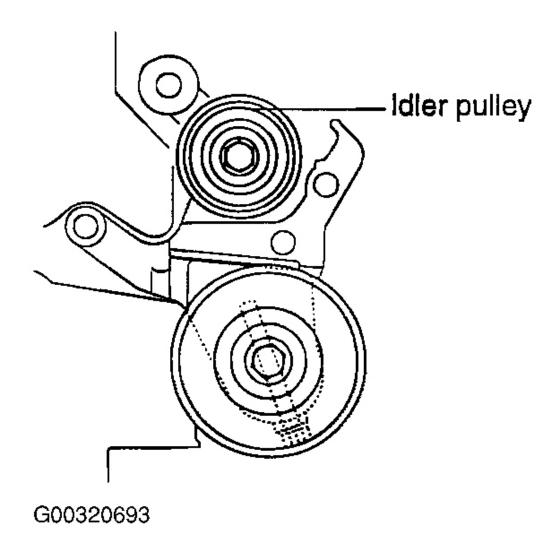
Installing The Idler Pulley To The Engine Support Lower Bracket Courtesy of KIA MOTORS AMERICA, INC.
